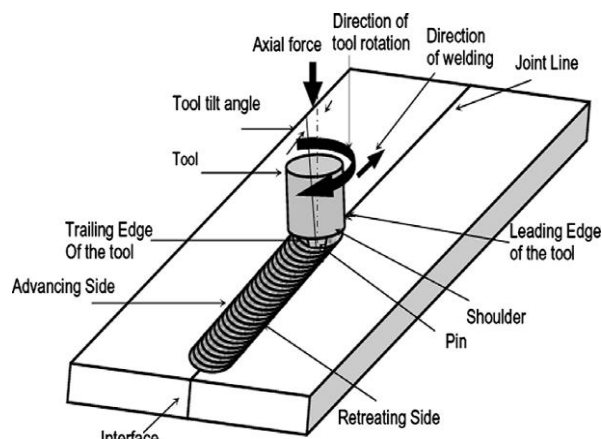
Set up of a Friction Stir Welding Process
